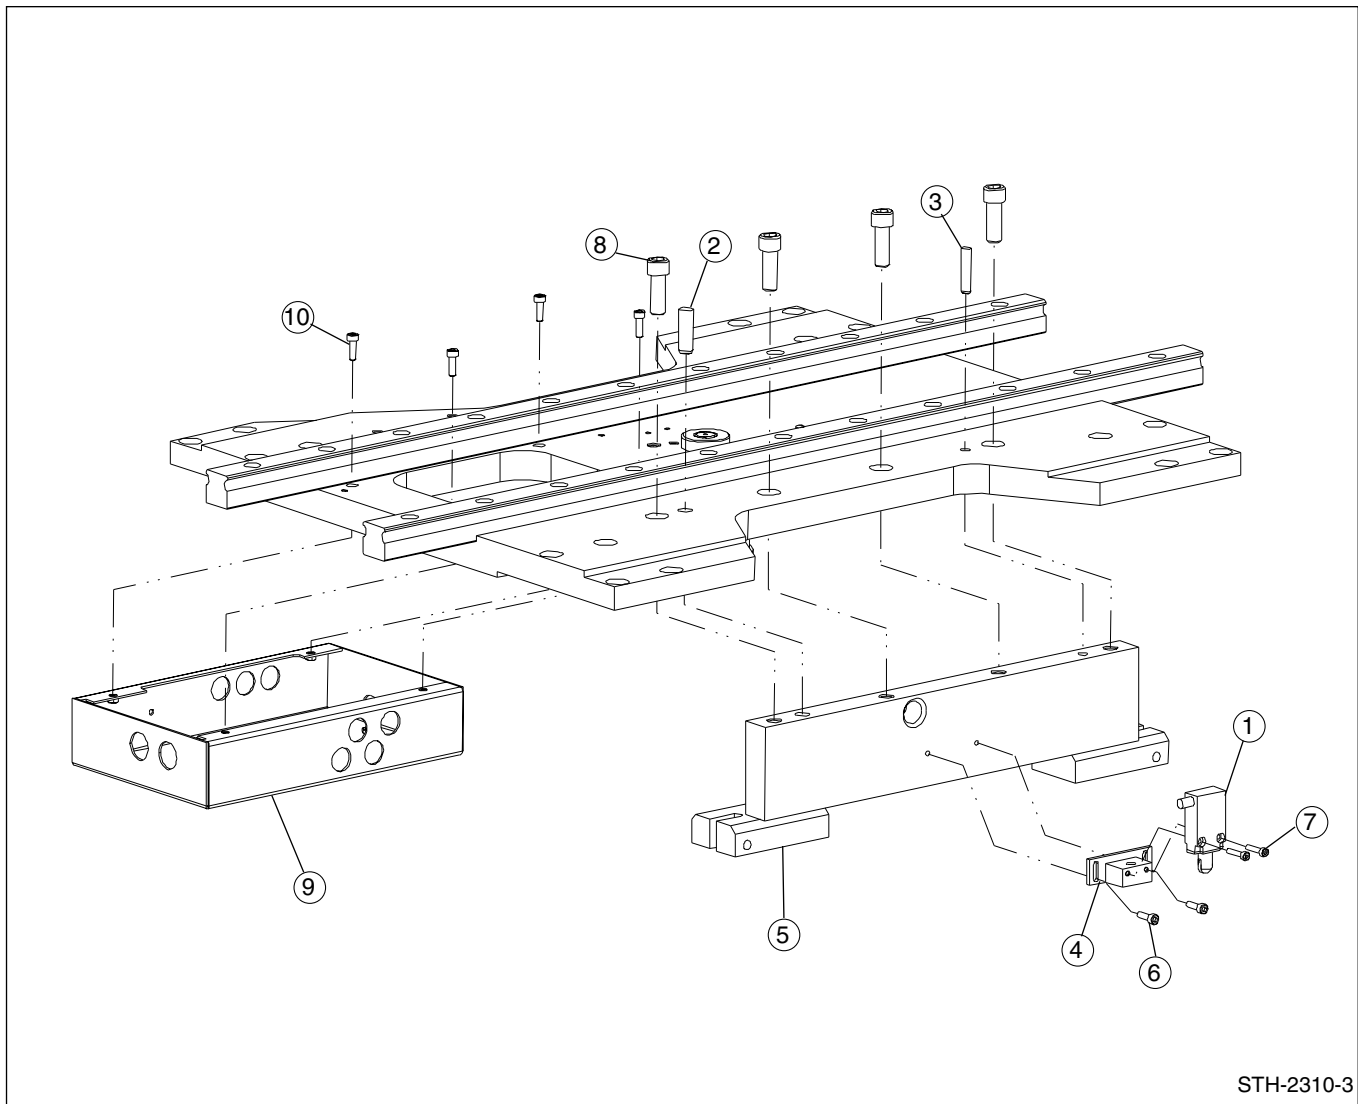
FIGURE H - CARRIAGE ASSEMBLY (2 of 3)
